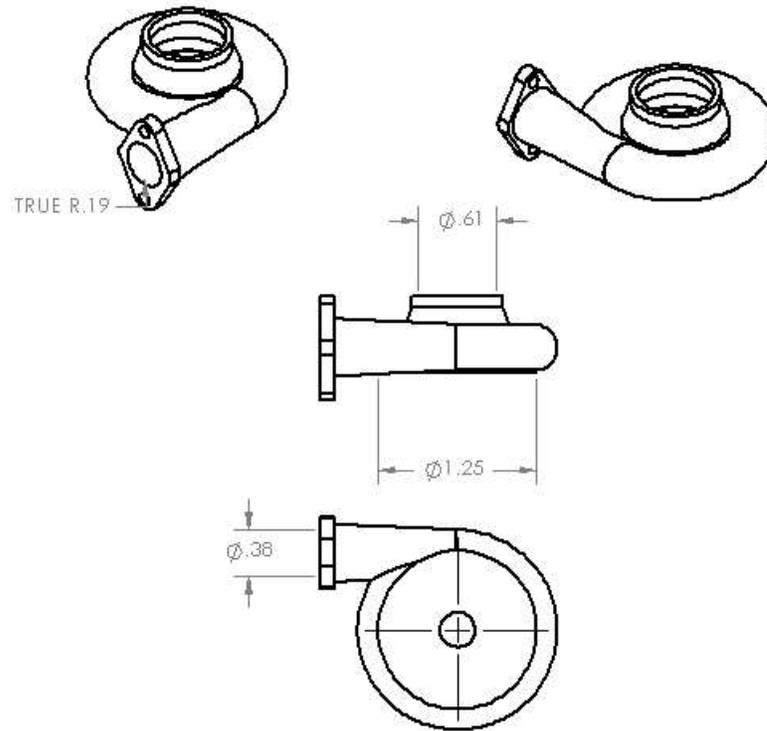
CAD Model of propeller housing of Turbocharger.
